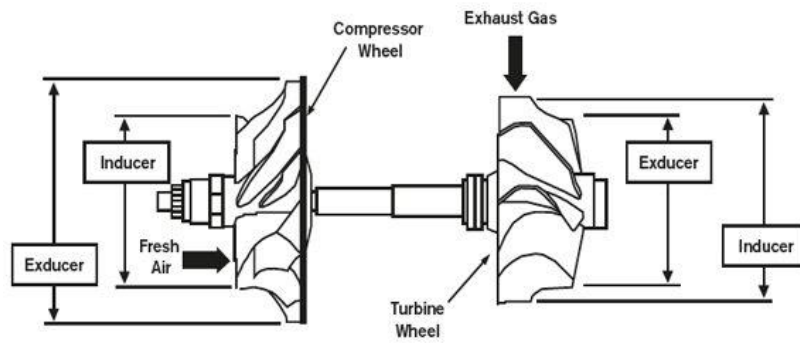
Illustration of the inducer and exducer diameter of compressor and turbine wheels (Machone, 2010).
